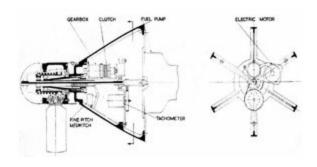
Mk 32 Tensator unit, fueldraulic motor and gearbox
